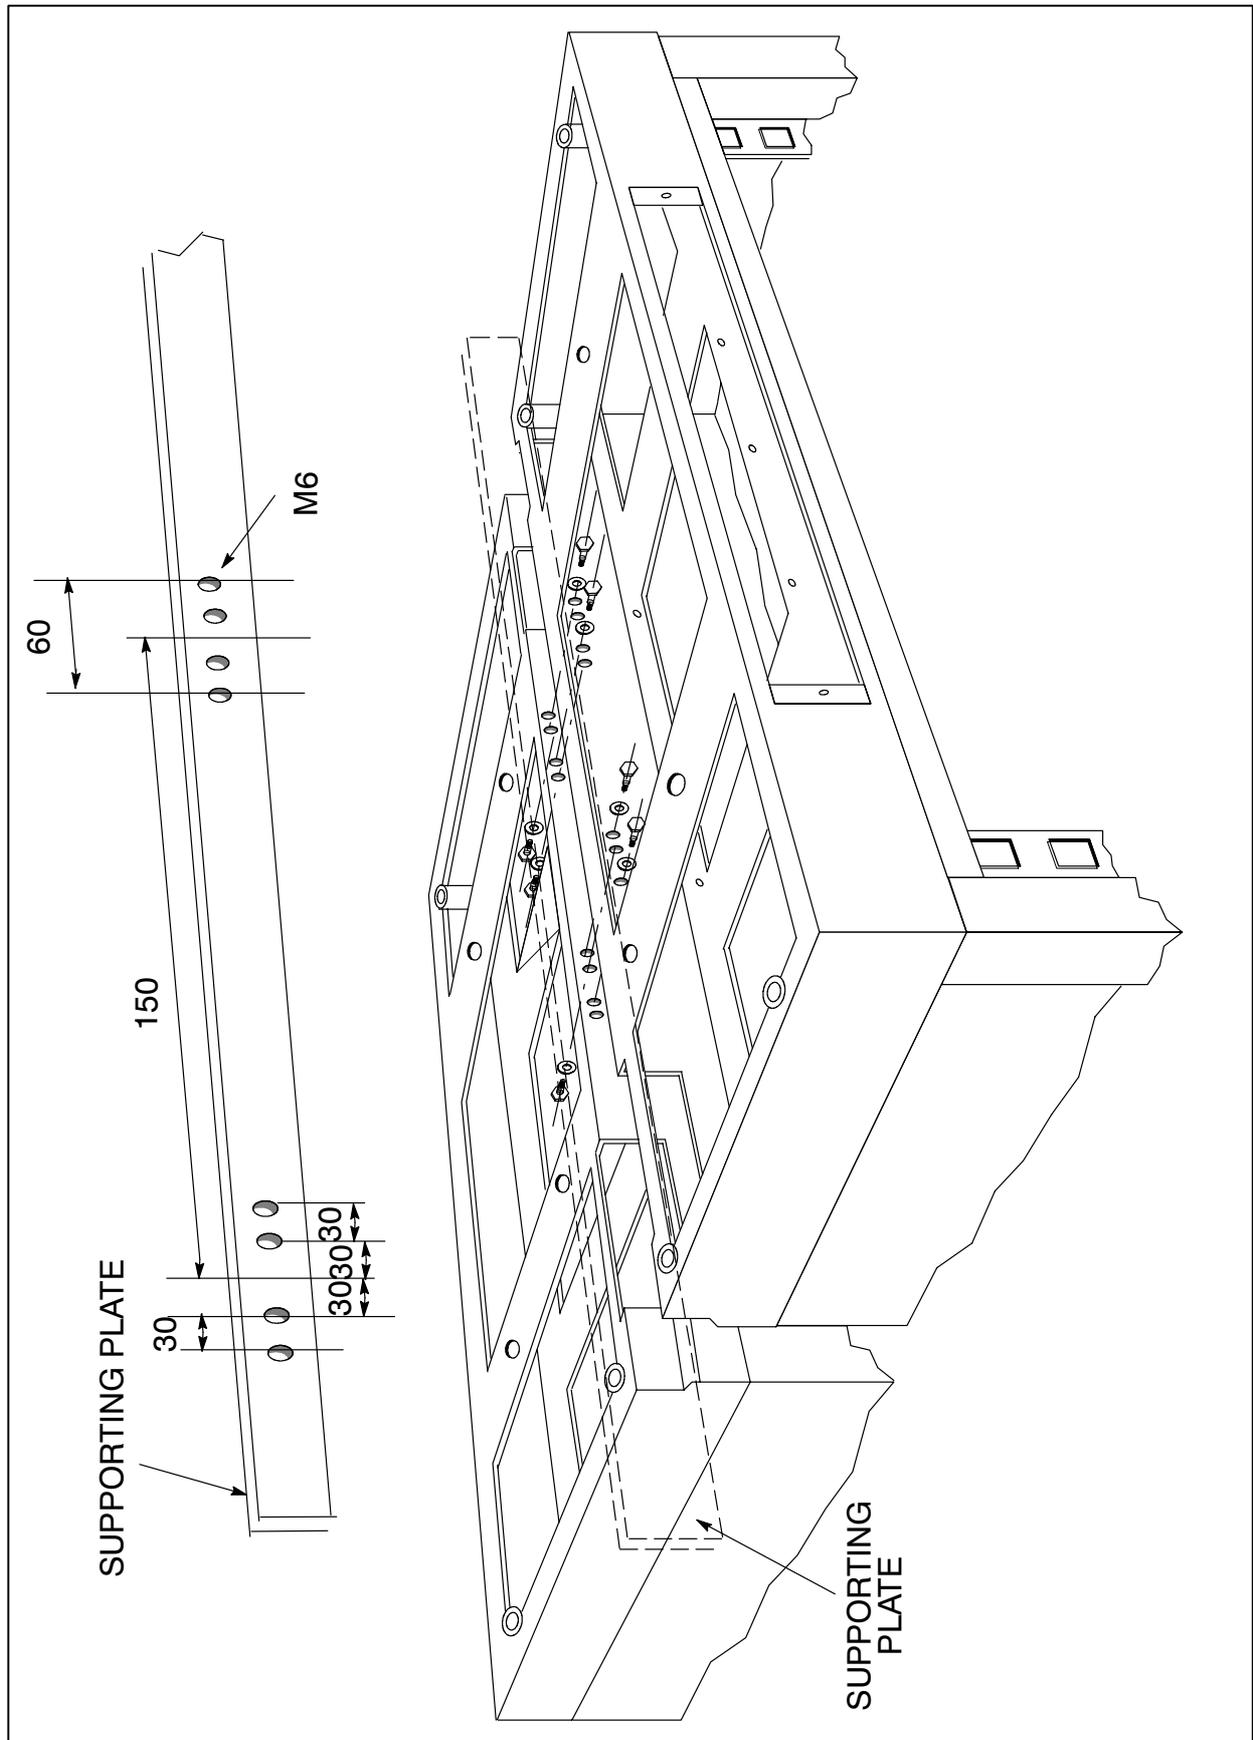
Back-to-back mounting – view of top elements and supporting plate
